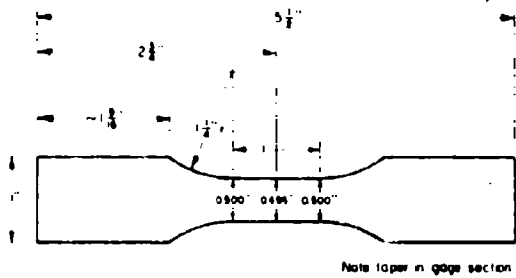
UNNOTCHED SHEET FATIGUE SPECIMEN
